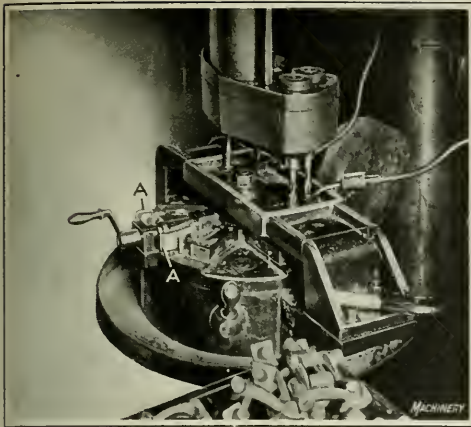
Drilling Machine equipped with Multiple Head and Indexing Fixture for drilling and reaming Valve Followers
